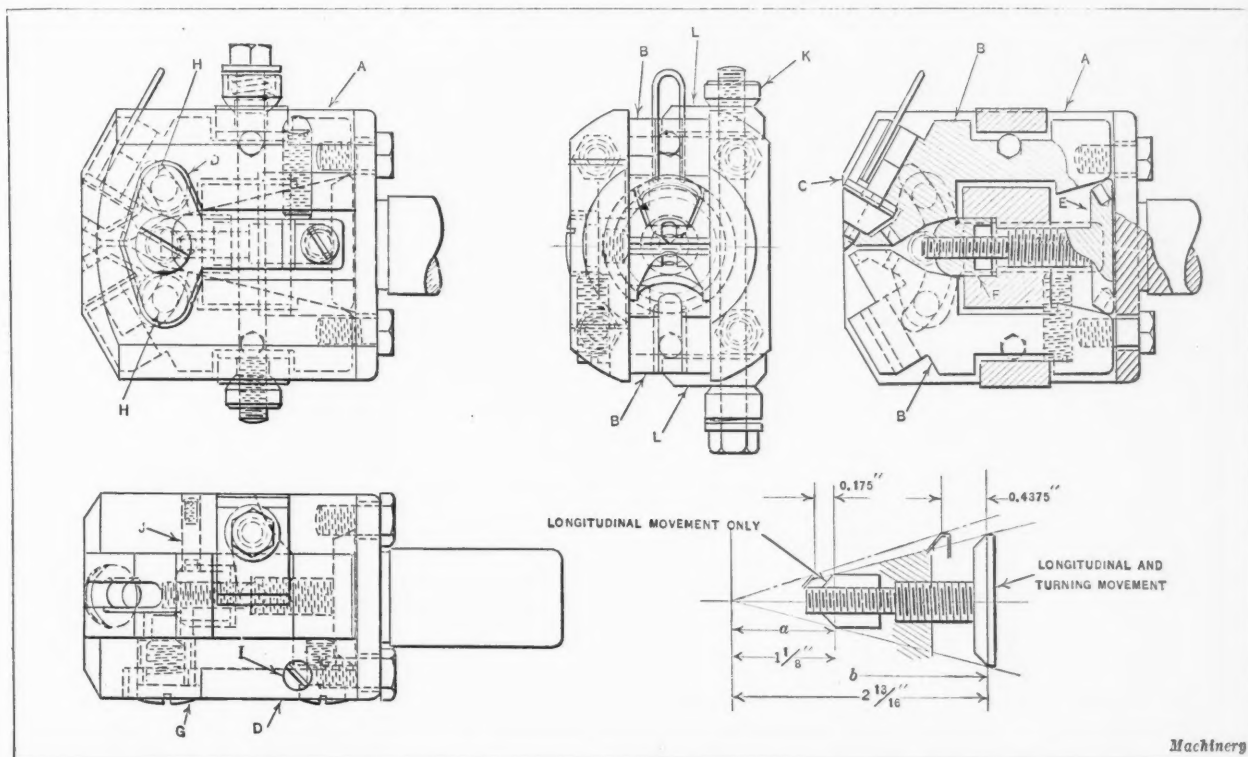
Improved Knurling Tool designed for Use in Automatic Screw Machine
